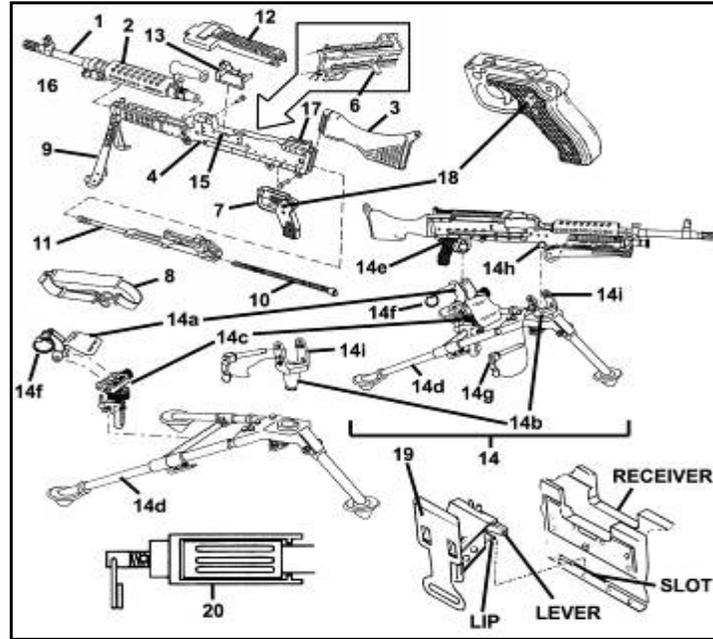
M240B, M122A1 tripod assembly, ammunition adapter, and M24 blank firing attachment
